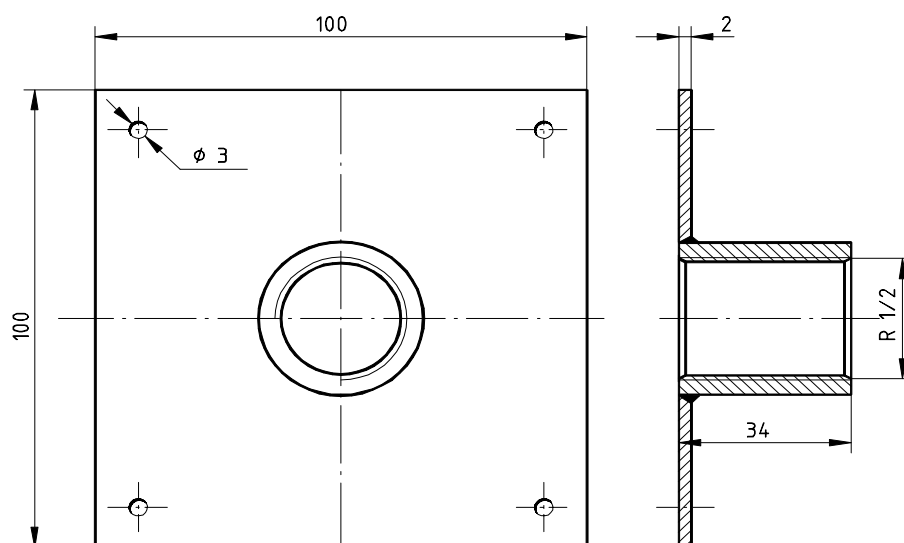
Dimensions for the Surface Temperature Sensor Holder.
